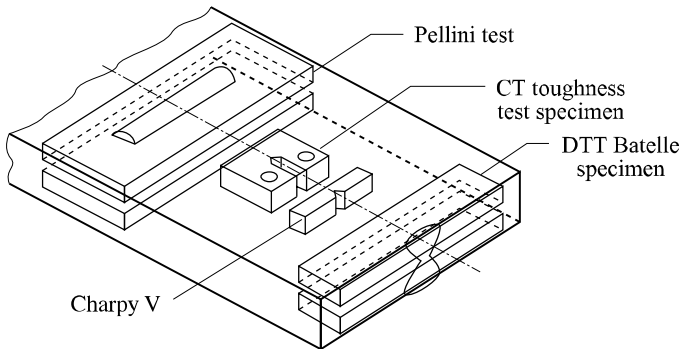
Taking of test-specimens in a welded joint; from [ANS 92]
